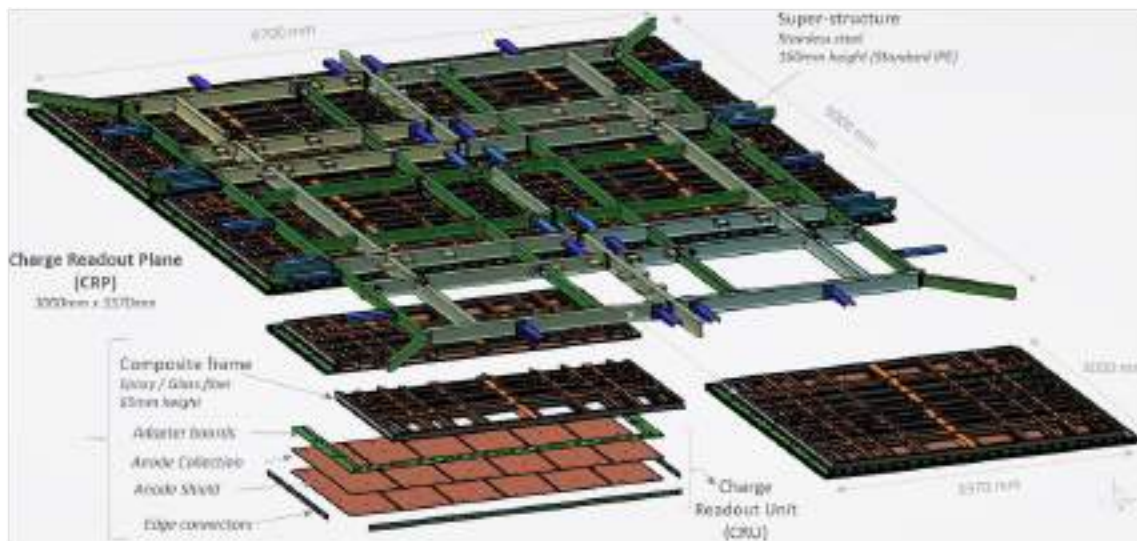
A top superstructure (green structure on top) that holds a set of six CRPs, and below it an exploded view of a CRP showing its components: the PCBs (brown), adapter boards (green) and edge connectors that together form a CRU, and composite frame (black and orange).
